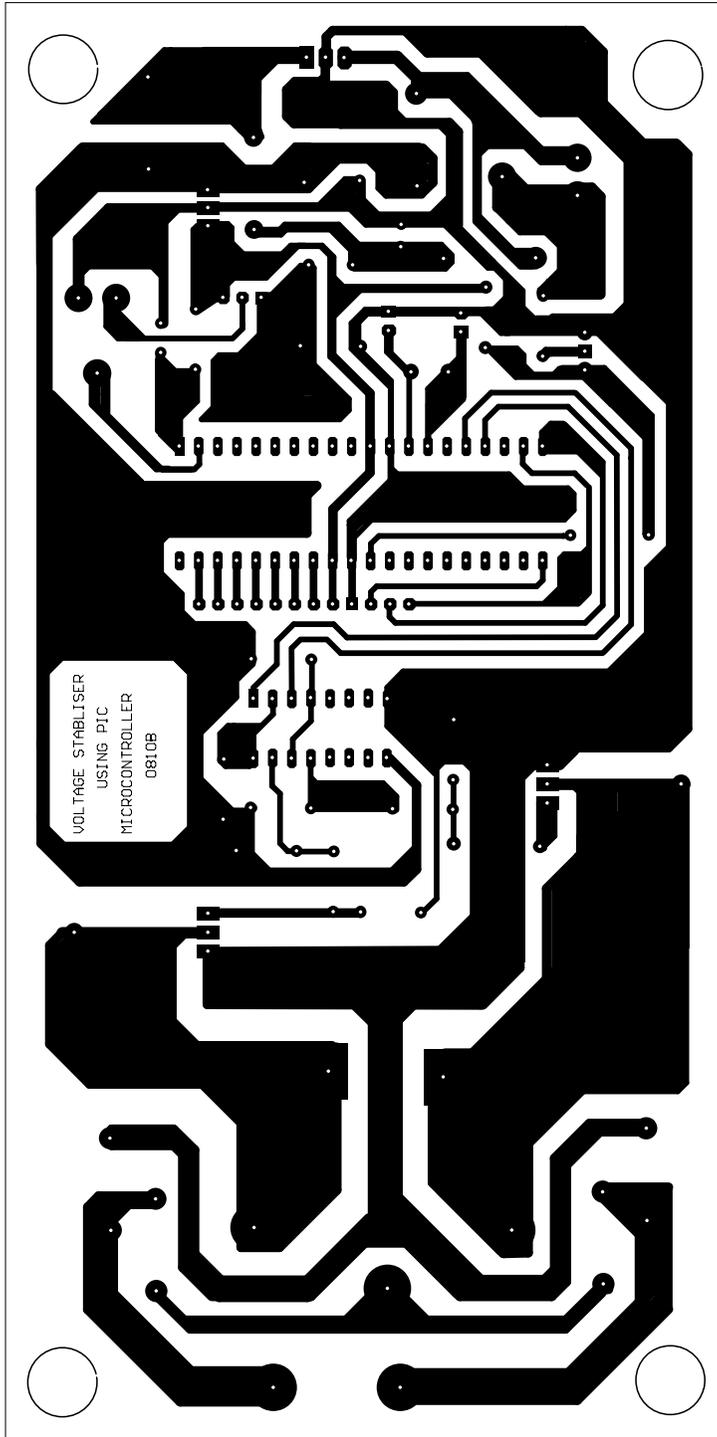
An actual-size, single-side PCB for the voltage stabiliser using PIC16F877A microcontroller
